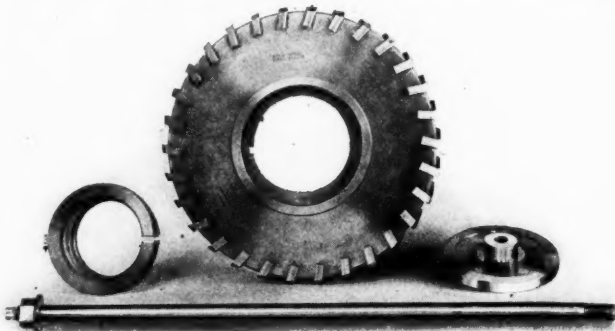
New Type Brown & Sharpe Inserted Blade Milling Cutter, with Sleeve, Clamping Plate and Drawing-in Bolt
